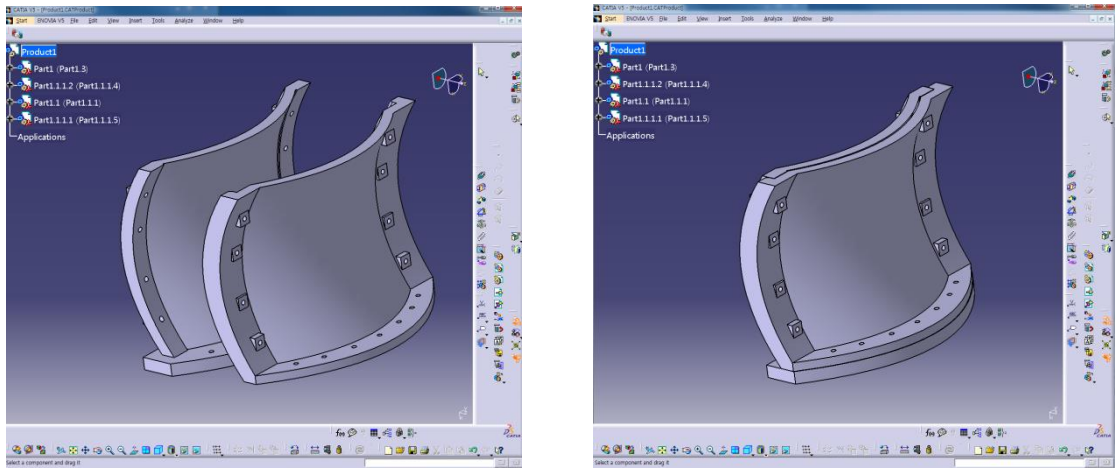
The casting mold designed by using 3D CAD program for the saddle shape bi-stable structure
